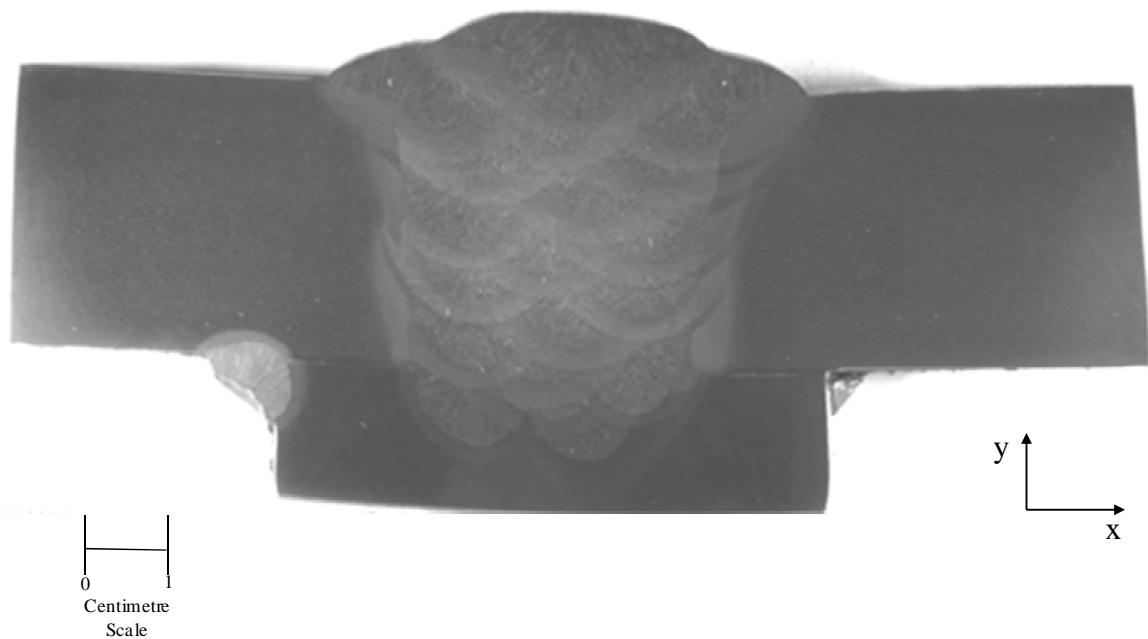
4 - Macrograph showing low alloy - ferritic steel weld metal (ESAB A533B Class 1) cross - section showing weld microstructure.
